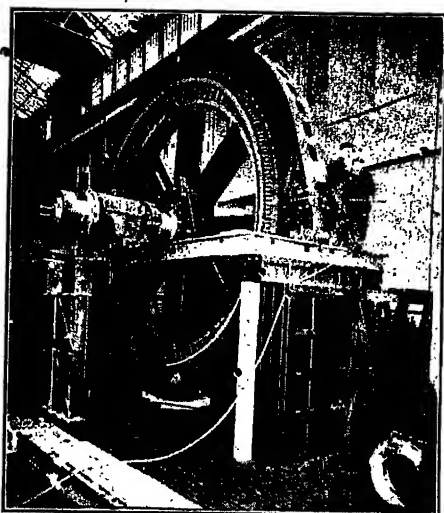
5000-HP., 82-REV. PER MIN. SYNCHRONOUS MOTOR FOR STEEL MILL DRIVE ASSEMBLED FOR TEST
